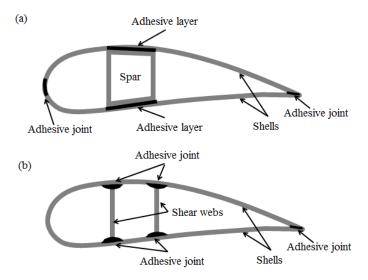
Adhesive joints at the various sections of the blade: (a) one-piece construction, (b) two-piece construction
